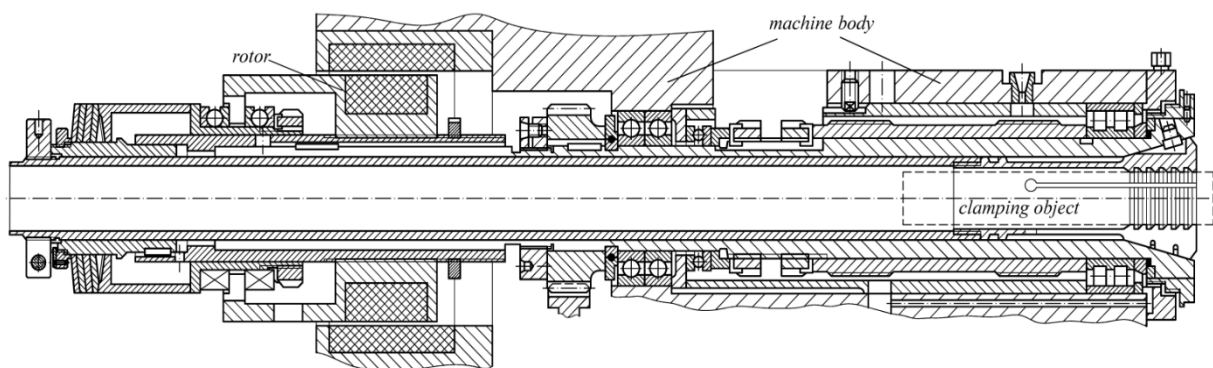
Design of the proposed clamping mechanism as part of the spindle assembly
